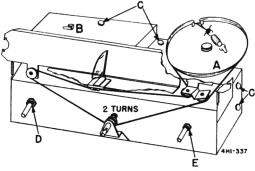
4H1 Radio Tuner Showing Chassis Cover and Dial Assembly.
